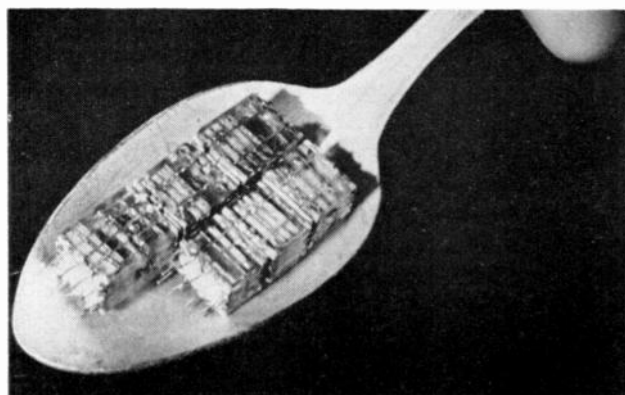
Stacked RCA micromodule shows means of interconnecting wafers by soldering or welding wires
